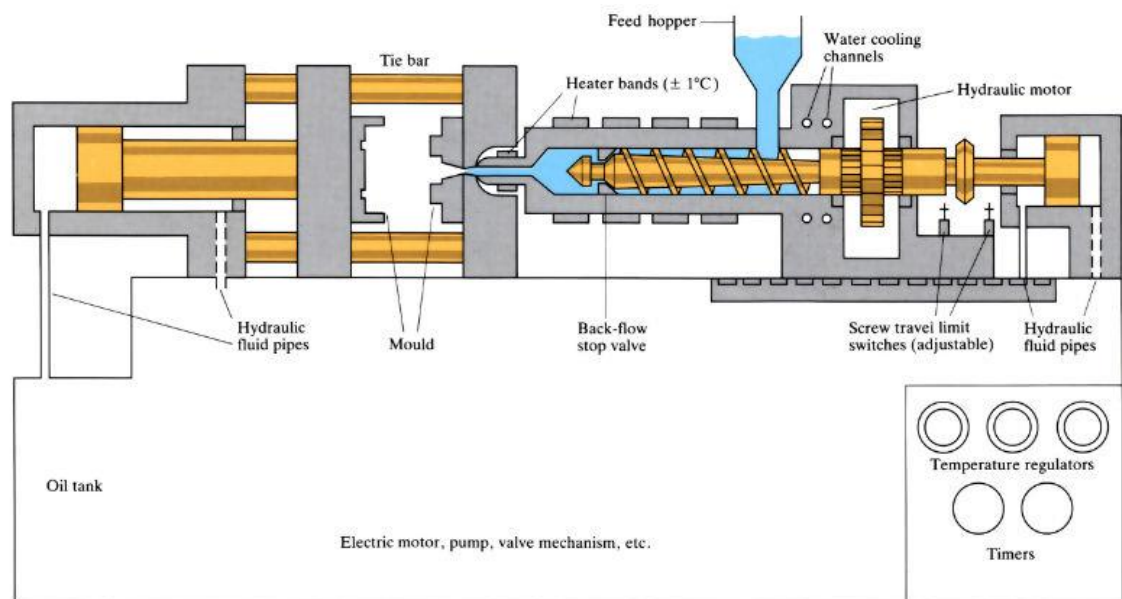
Schematic of an injection moulding machine. Raw material is melted in a screw barrel and injected into the mould cavity at high pressure. Image credit: [136]
